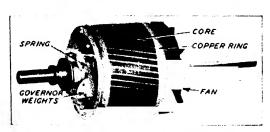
Squirrel-Cage Rotor for High-Resistance, Solit-Phase Motor
